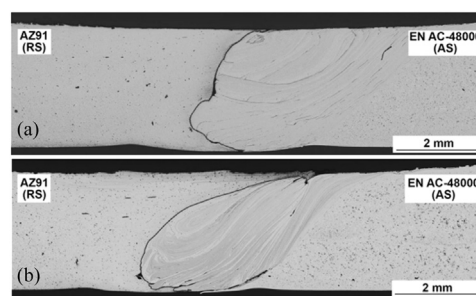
Cross-sectional images of the weld zone of dissimilar die-cast aluminum alloy EN AC-48000/AZ91 welded joint fabricated by FSW: (a) conventional FSW without ultrasonic vibration and (b) ultrasonic vibration assisted-FSW [159].
